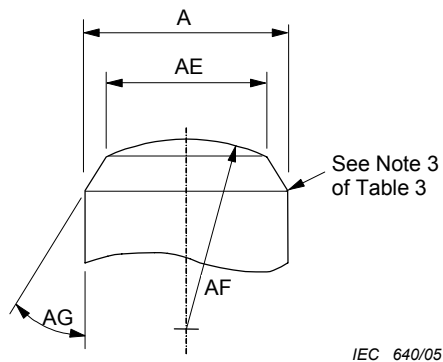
Detail A of Figure 1 – PC polish plug connector interface – Expanded view drawing not-to-scale
